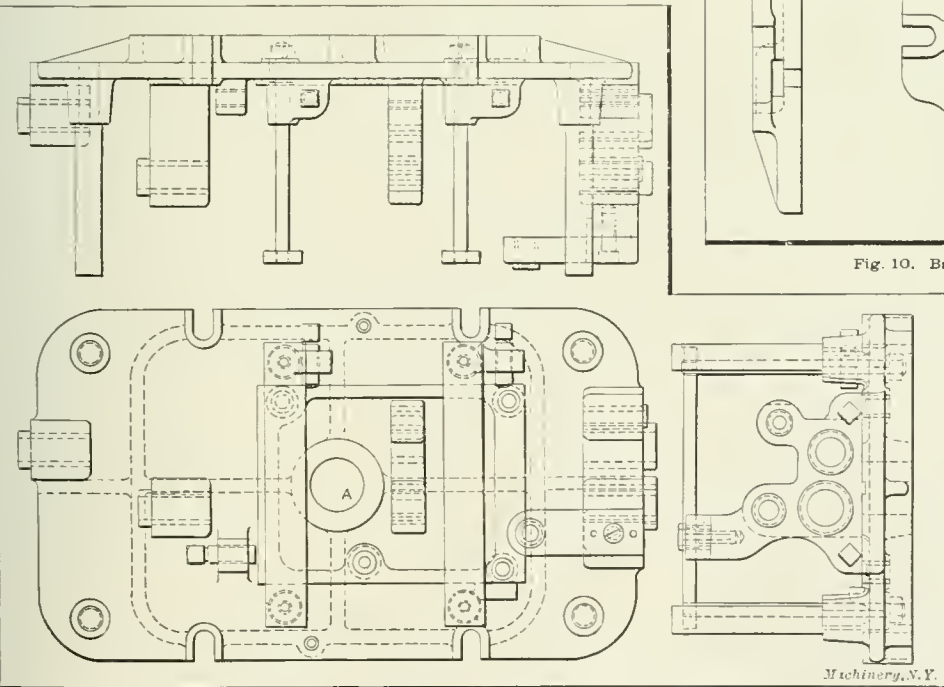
Jig for Drilling and Boring Feed Gear-box in Fig. 9
